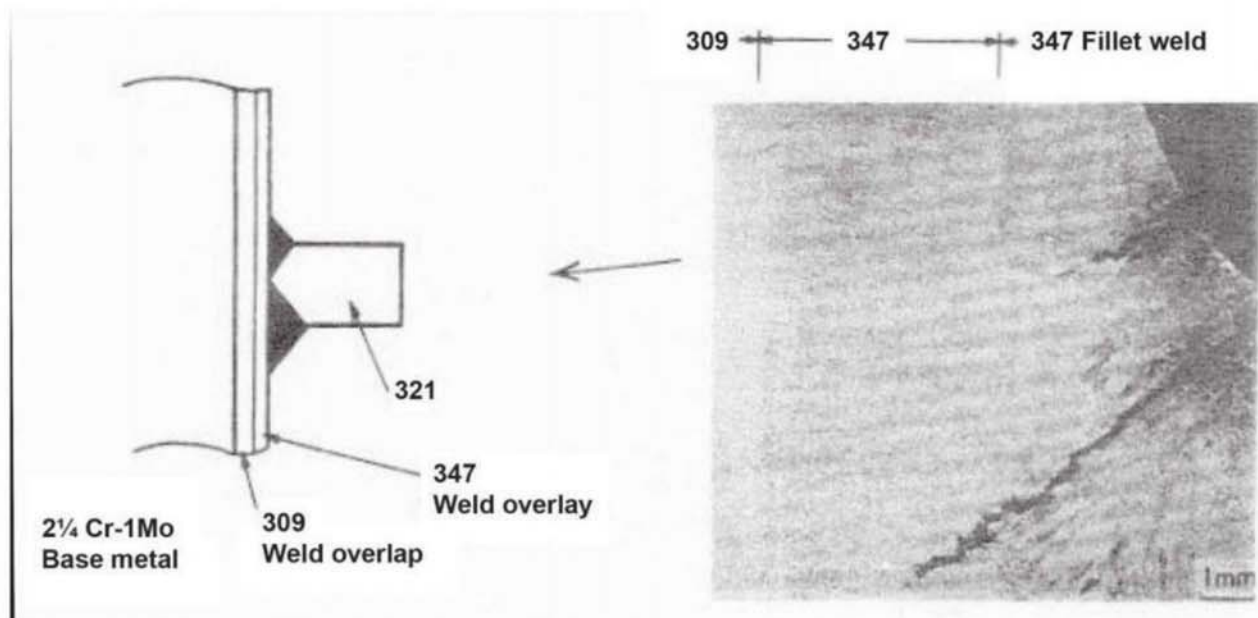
Metallographic Cross Section Showing Cracks in the Stainless Steel Weld Overlay in the Corner of an Internal Support Ring
